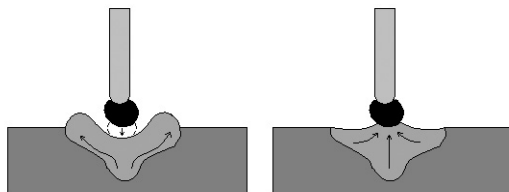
Humping bead appearance at the high speed welding formed by the multiple instantaneous short circuit and long arc period
